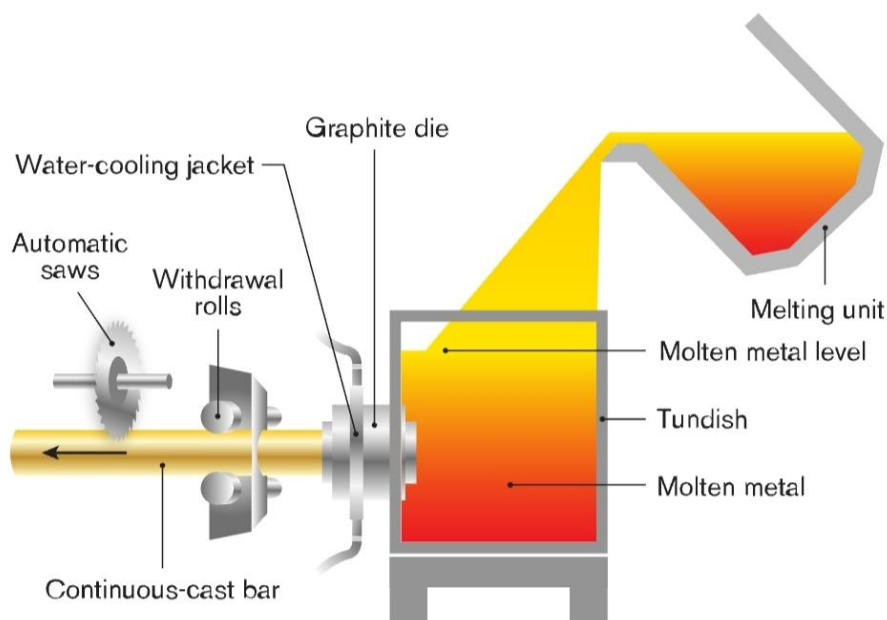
Schematic sketch of horizontal continuous casting process.[8]
